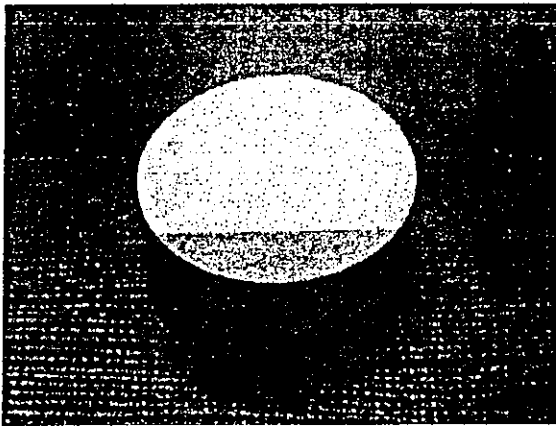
Photograph of fracture surface after 3-point bending test.
